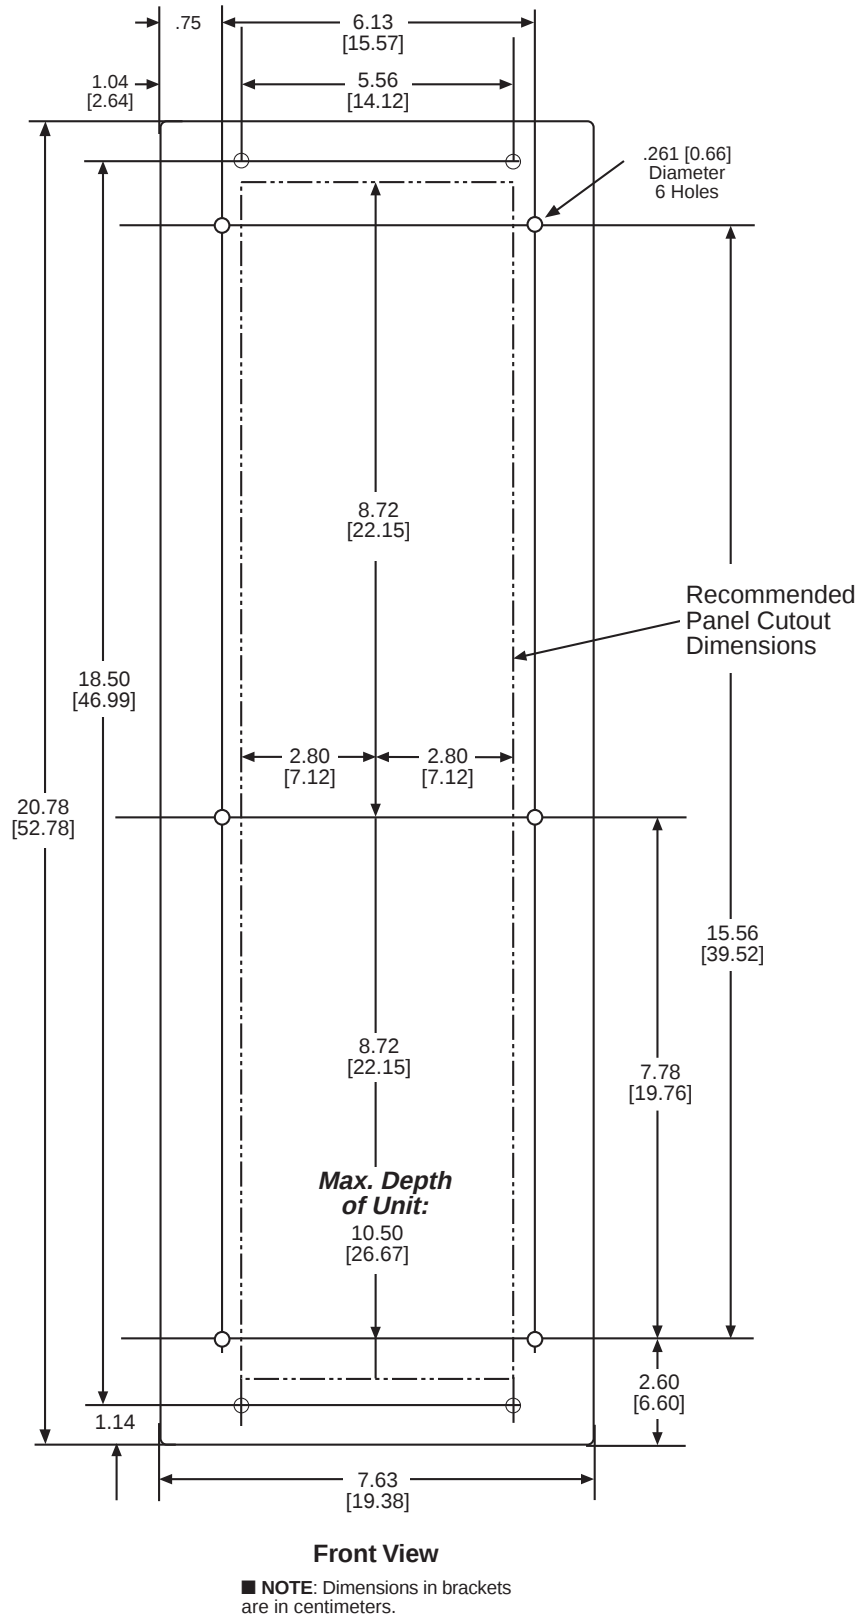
(H3) Mounting Dimensions for GE L-2 Cabinet
